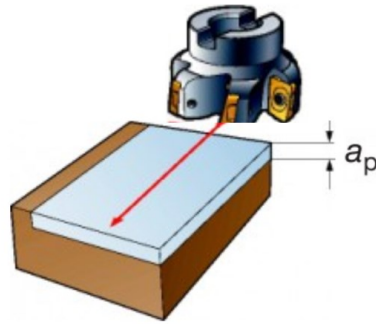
Straight Tool Entry . Source: Sandvik Coromant (Face Milling)
